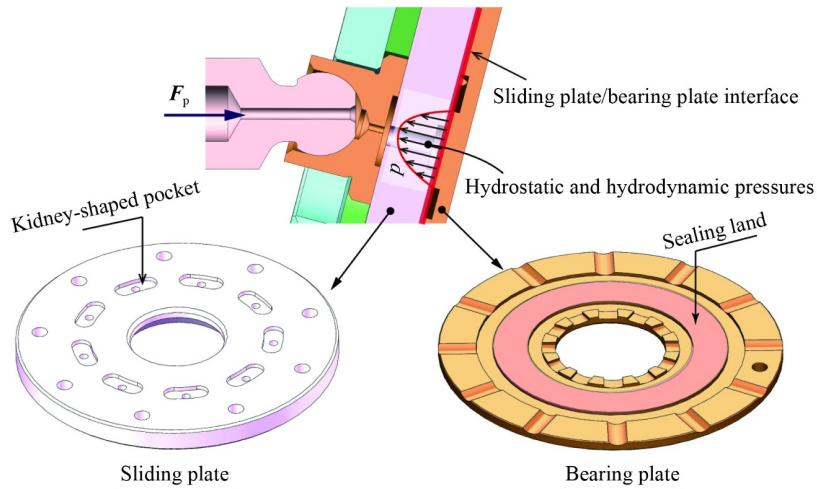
Illustration of the sliding plate/bearing plate interface.
